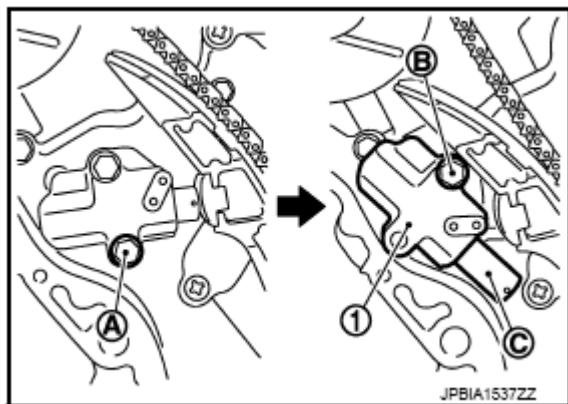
Identifying Timing Chain Tensioner, Plunger And Mounting Bolt
